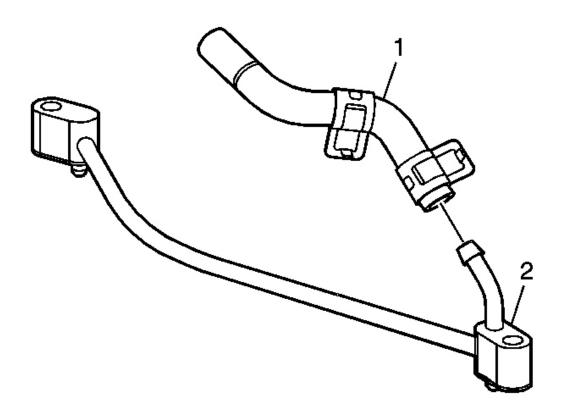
Coolant Air Bleed Hose & Pipe Courtesy of GENERAL MOTORS CORP.
